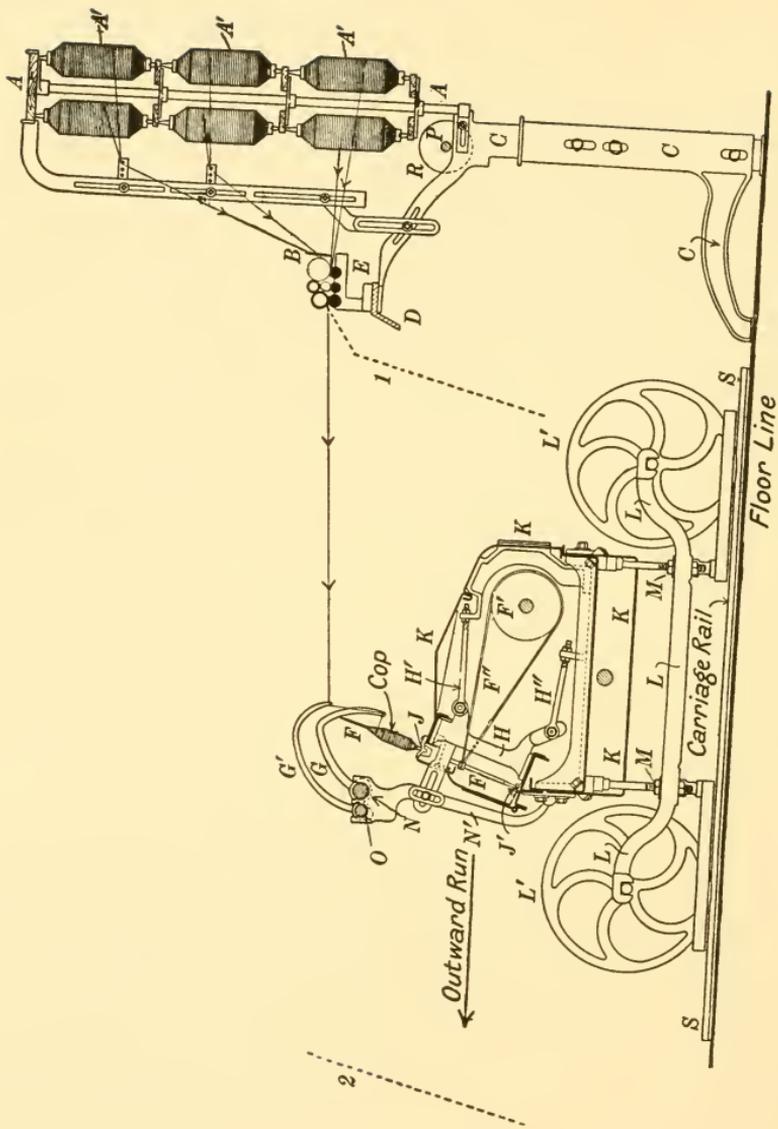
SECTION THROUGH CREEL AND CARRIAGE
